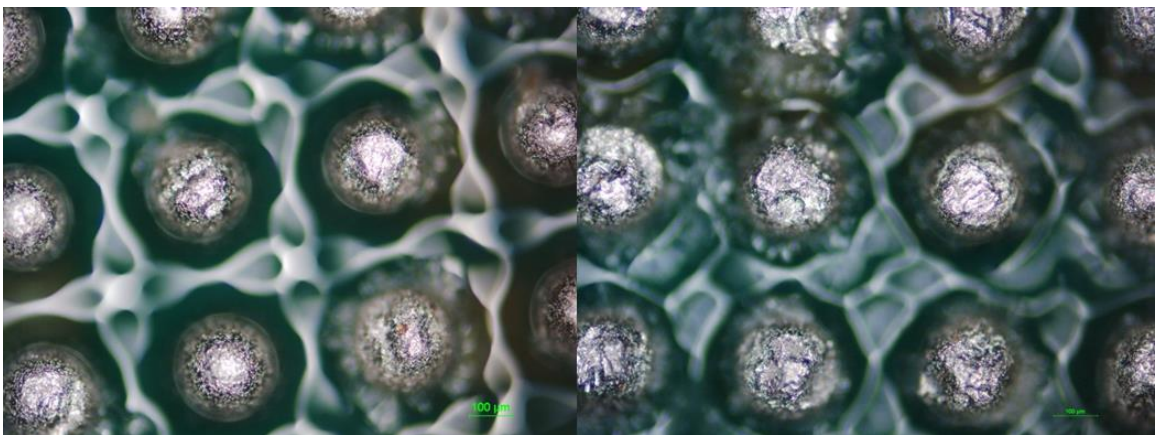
Damage on solder ball surface after 5 sec (left) and 30 sec (right) of sand blasting with 250 μm diameter pumicite
